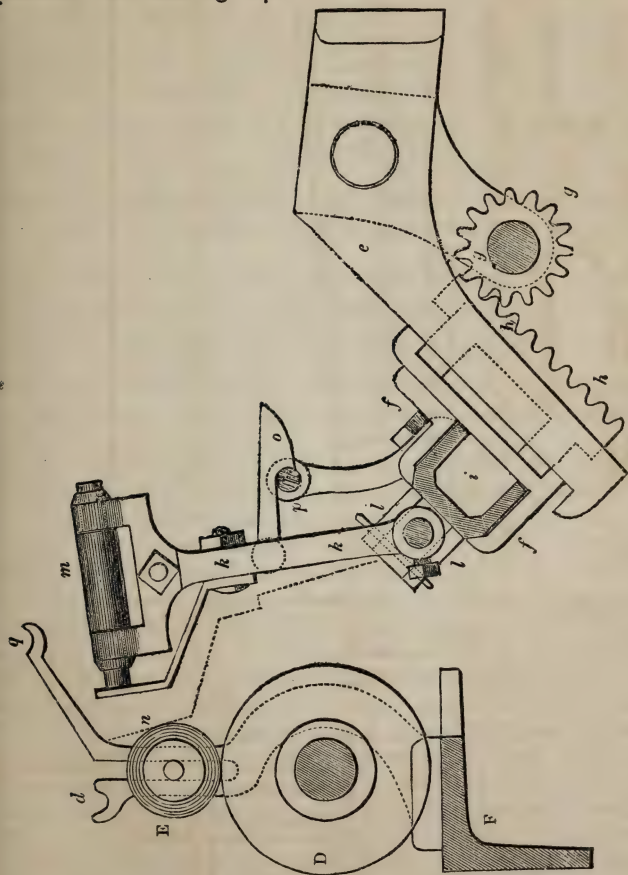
Tube-Roving Frame. Working parts in Section. Scale, three inches to the foot.
